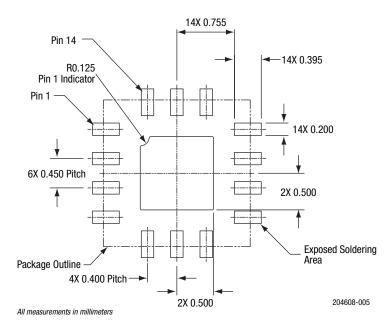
SKYA21029 PCB Layout Footprint (Top View)
